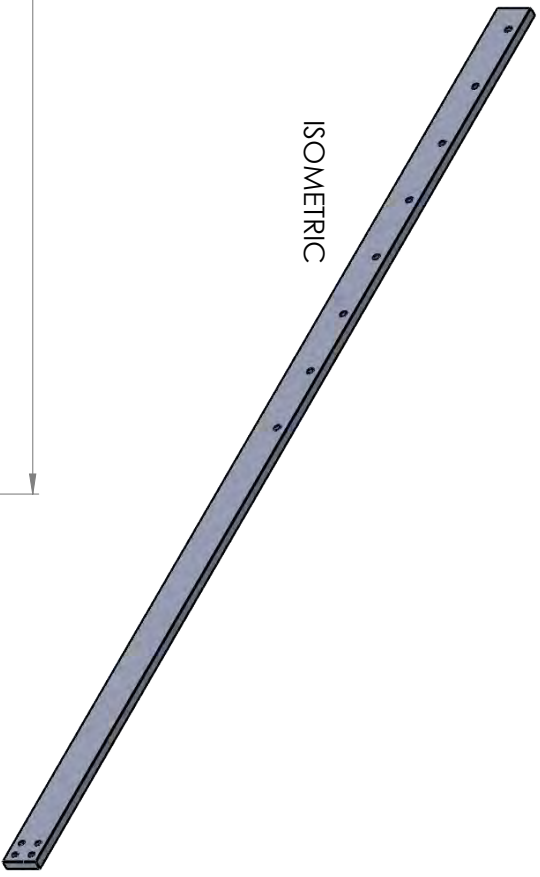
CAD Engineering drawing for Manfrotto™ tripod mount of metal plate as part of adaptor subassembly for manipulator.
